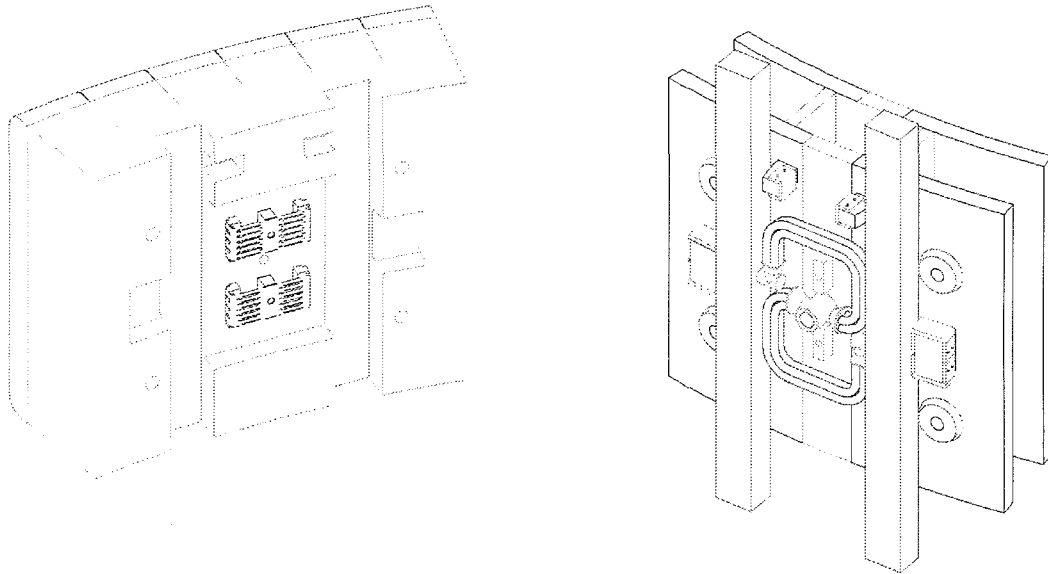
Typical attachment of the inboard blanket modules.
